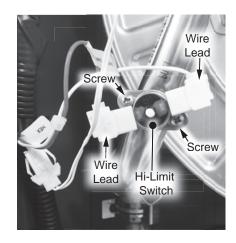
Disconnect and remove hi-limit switch from HEX outlet tube
